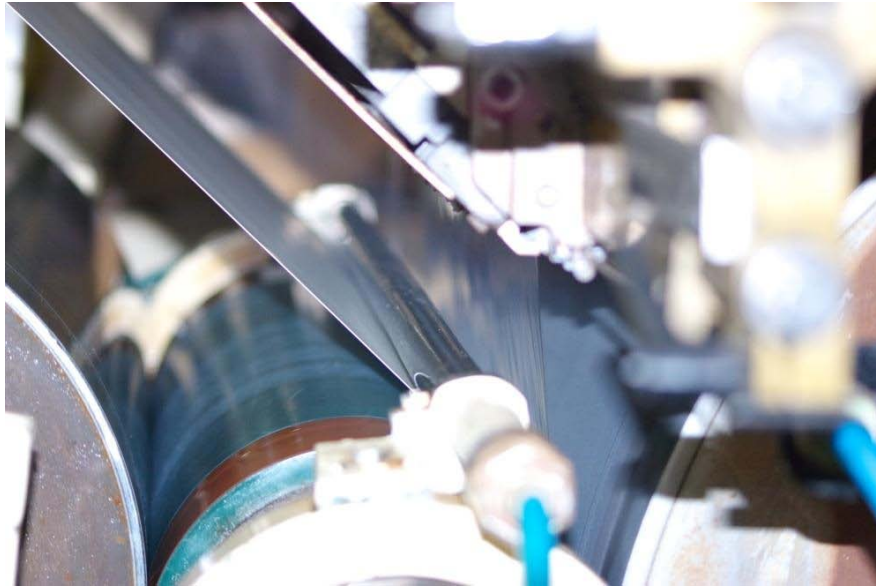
Extrusion coating machine in action, die pouring plastic on the cardboard. (Photograph Mikko Ketonen 2011)
